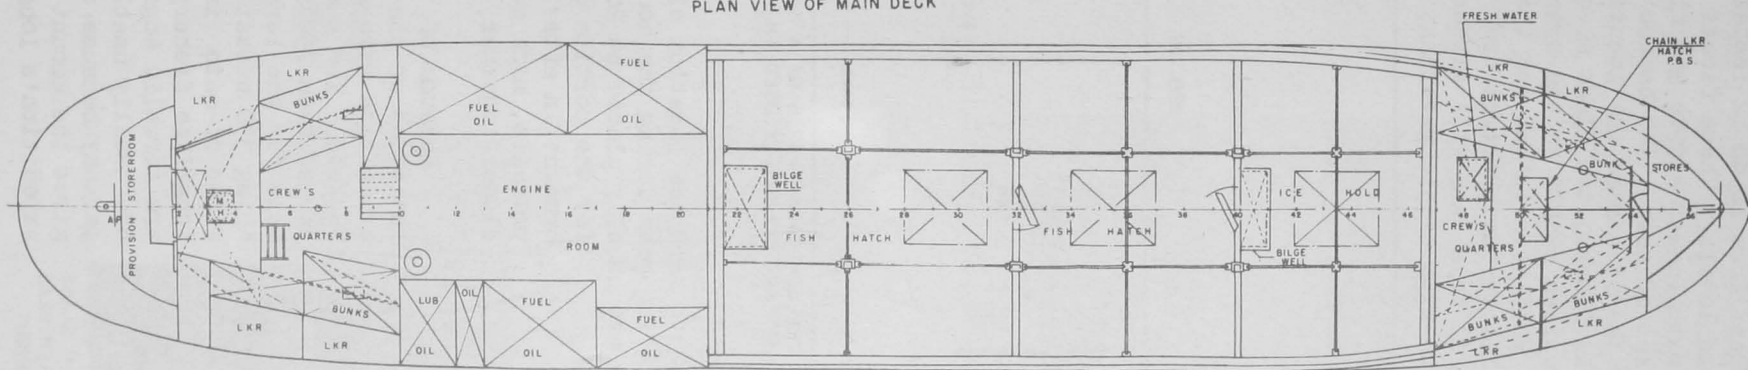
GENERAL PLAN OF CONSTRUCTION OF A JAPANESE LONG-LINE FISHING VESSEL.
